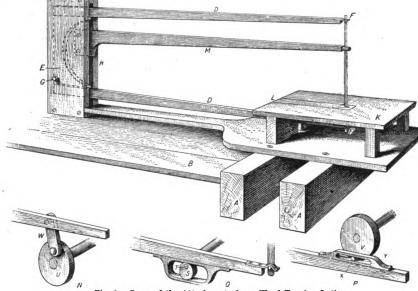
Some of the Attachments for a Wood Turning Lathe.
